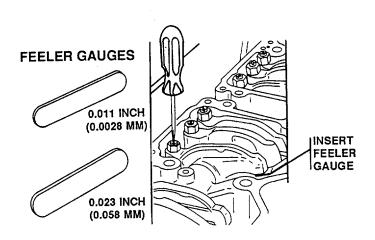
Checking Valve Lash (Feeler Method).
